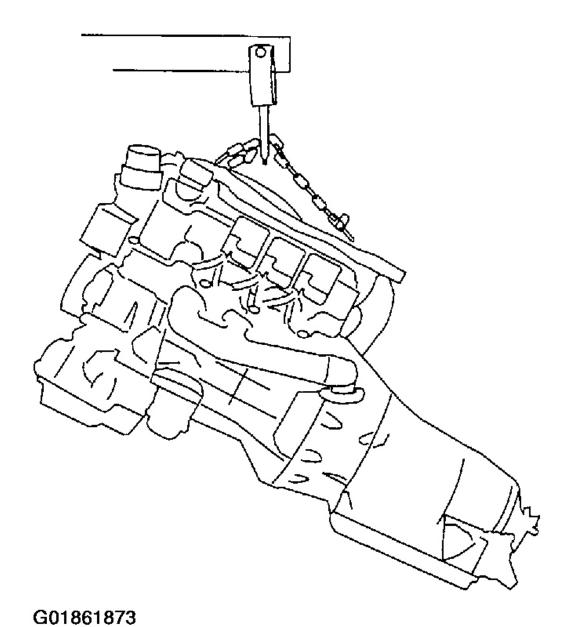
Removing Engine & Transmission Assembly Courtesy of DAIMLERCHRYSLER CORP.
